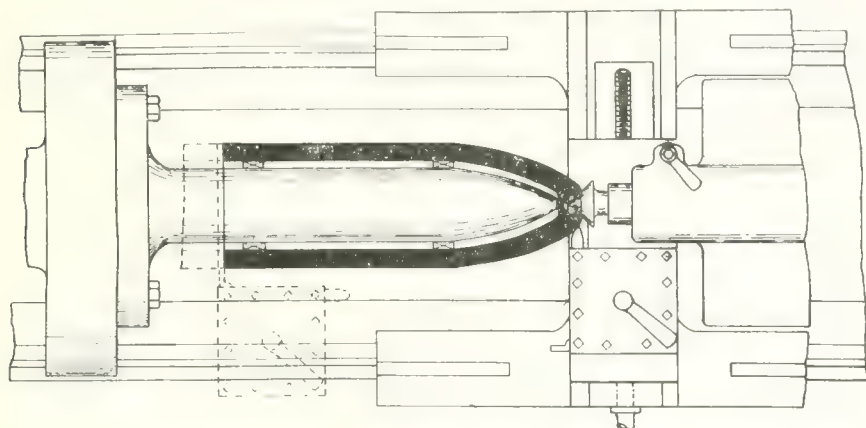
ROUGH TURNING AND CUTTING OFF ON REGULAR ENGINE LATHE
